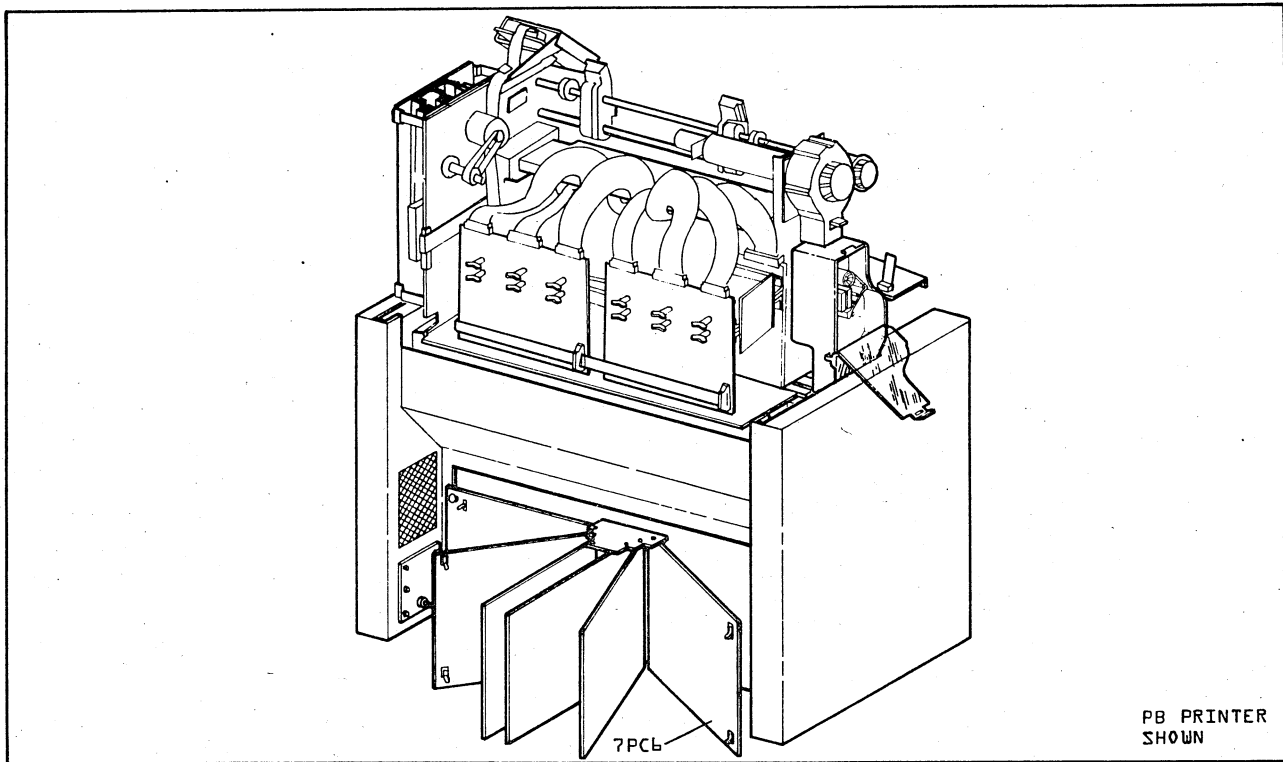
PB ASSEMBLY INSTALLATION
